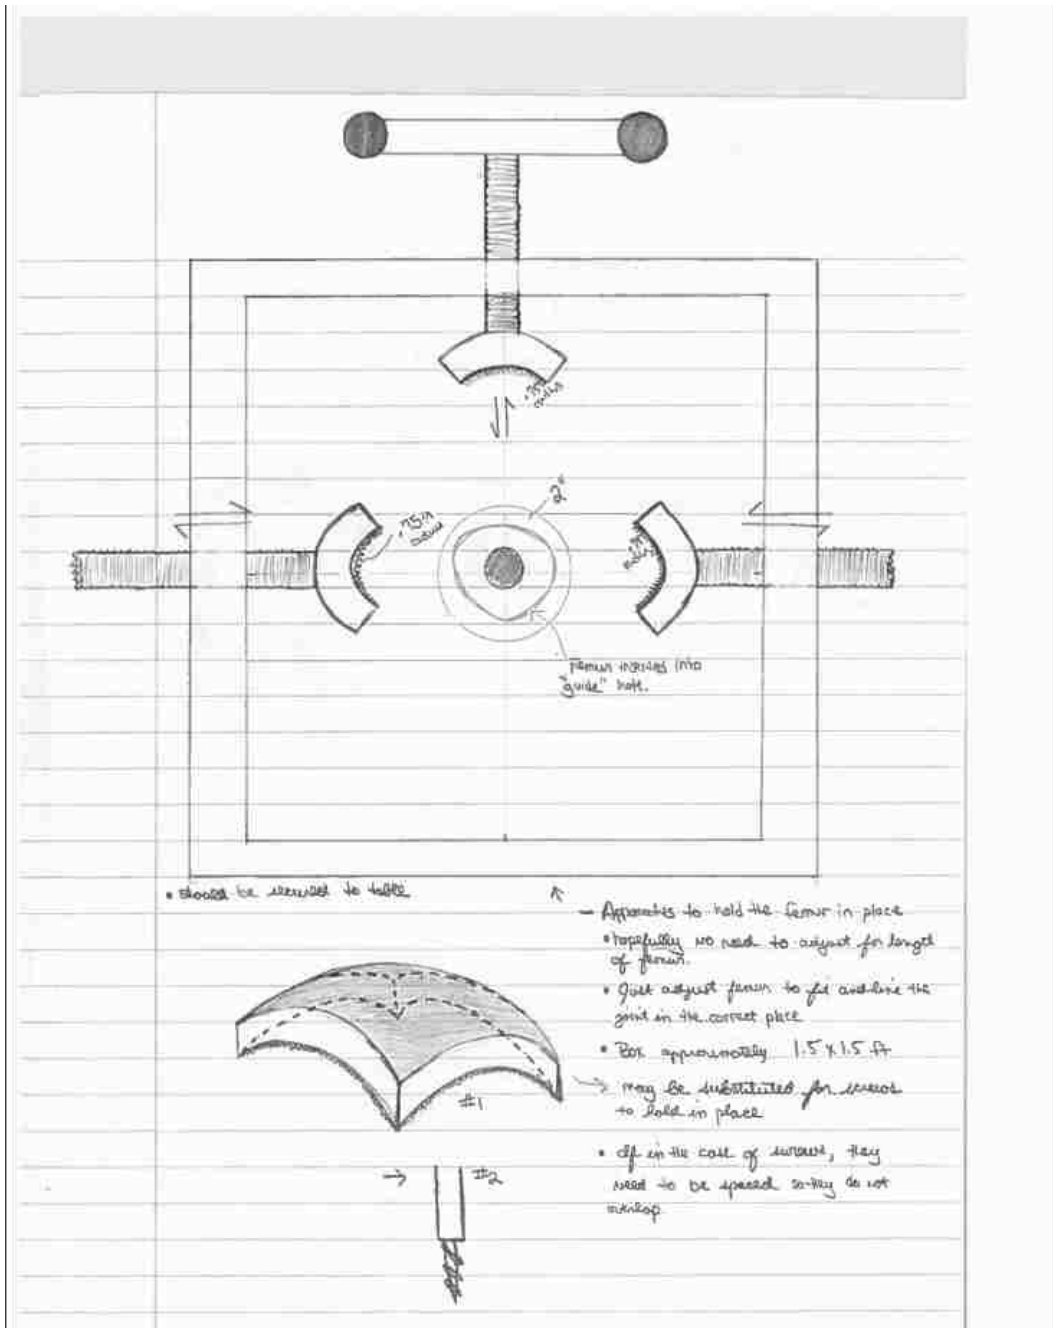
Initial rendering of the mechanism that would fix the proximal femur into the testing fixture
